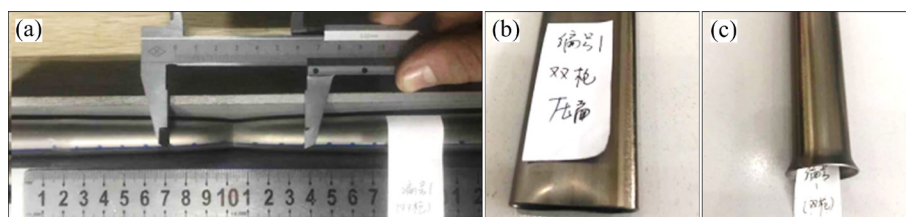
Mechanical test samples of titanium welded tube: (a) Tensile test; (b) Flattening test; (c) Flaring test
